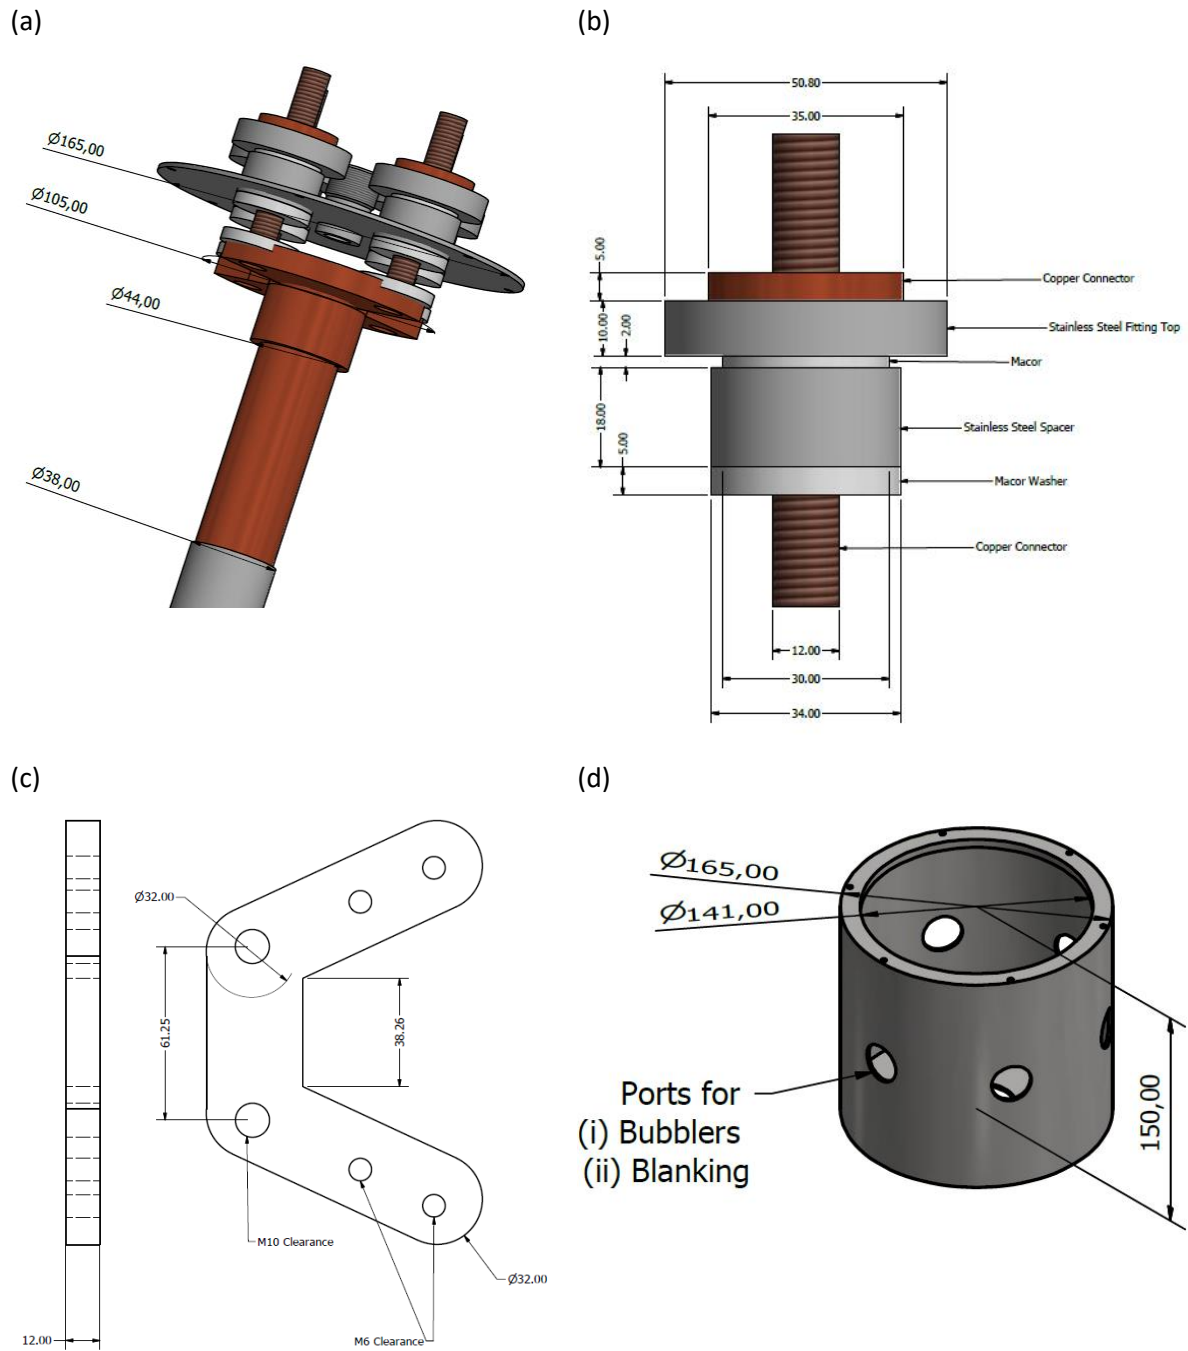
Probe head assembly drawings: (a) Internal components of the probe head and the top plate. (b) One of the four current connectors inside the probe head. (c) The probe head current contacts manufactured from OFHC copper. [mm] (d) The stainless steel can of the probe which is soldered to the stainless-steel tube. Bubblers and blanking plates are connected to the ports.
